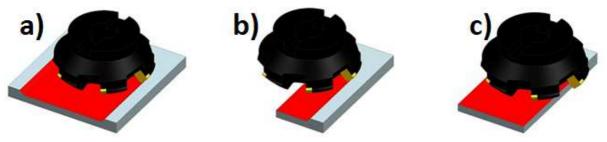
Milling by milling head: a) full immersion, b) side milling, c) face milling.
